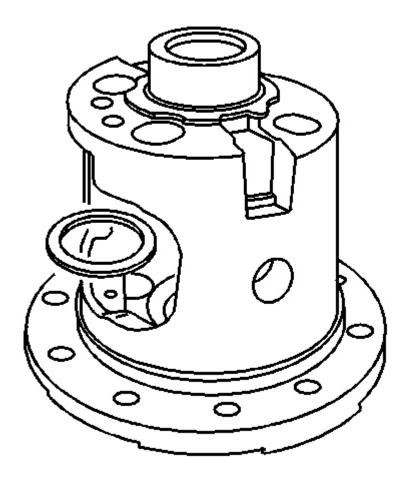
View Of Left Side Gear Thrust Washer Courtesy of GENERAL MOTORS CORP.
